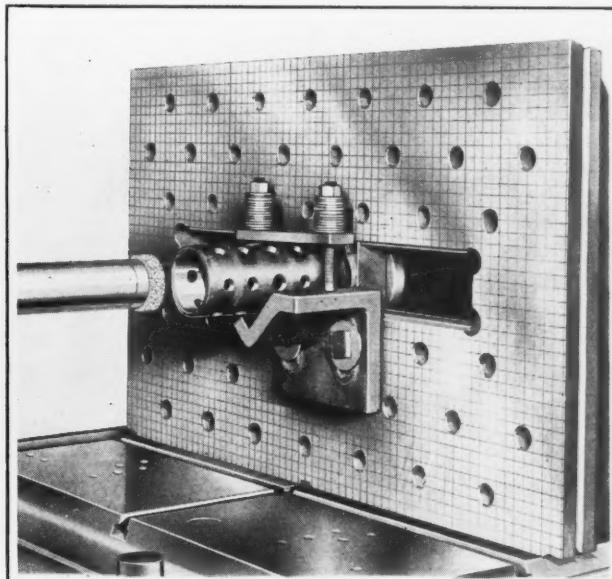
The V-type Angle-plate Used for Holding Bushings
